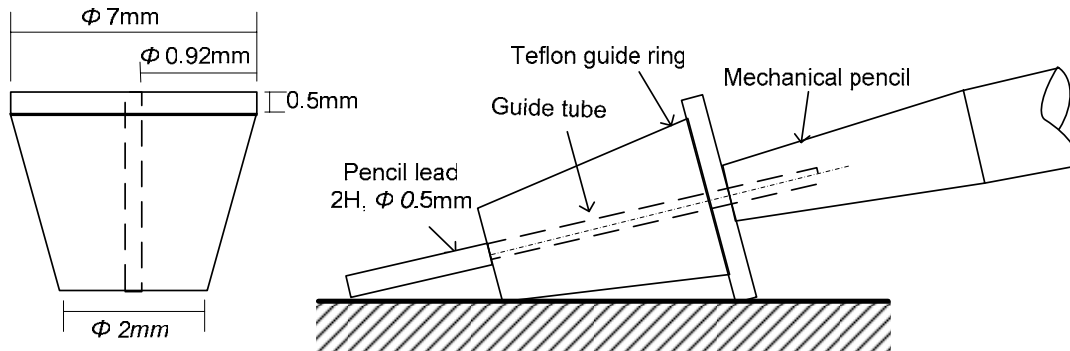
Drawing and dimensions of guide rings and pencil [100]
